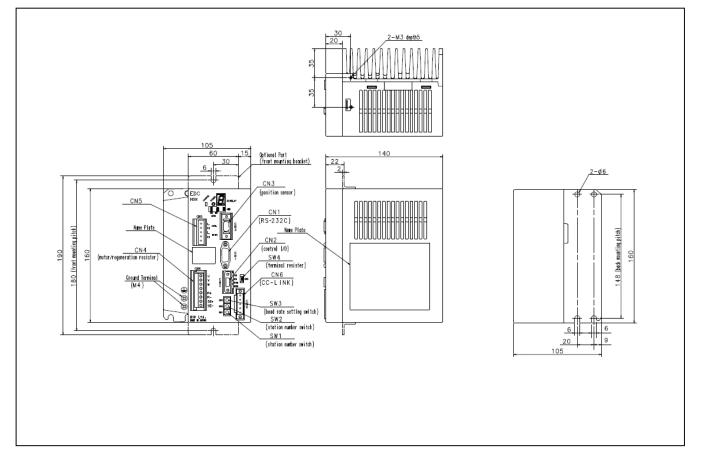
EDC Driver Unit for PN3045, PN4135 and PN4180 Megatorque Motors
